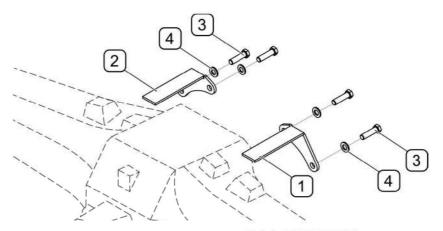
A Mounting limiters on front axle (ZEFIR 85/85K)
